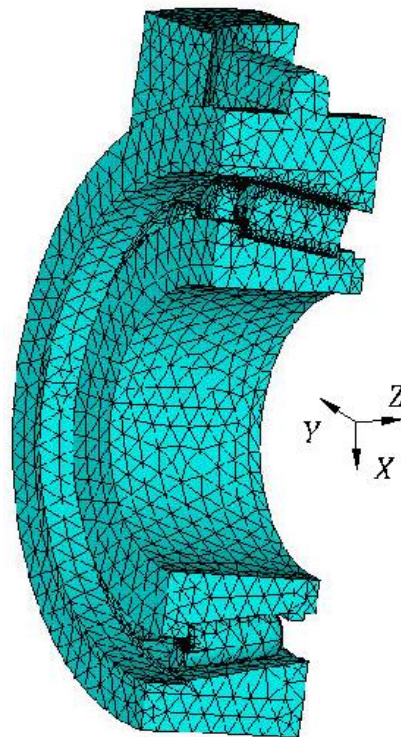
The final finite element model of a bushing bearing assembly with a tapered roller bearing
